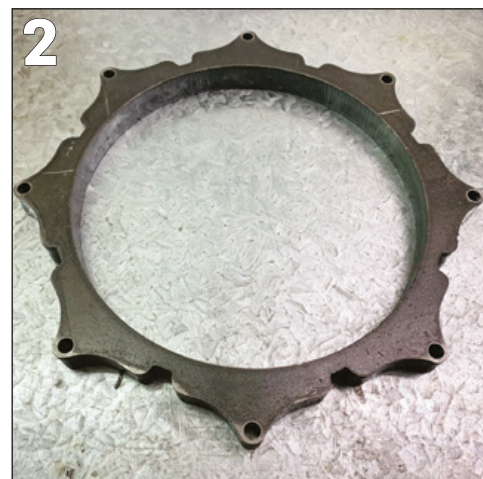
7¼-inch gauge brake-block ring at similar stage – up to eight brake-blocks can be made from this
